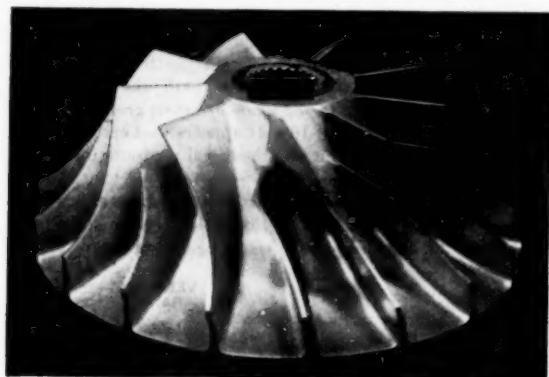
ALTERATION TO ELLIPTICALLY BLADED IMPELLER E
